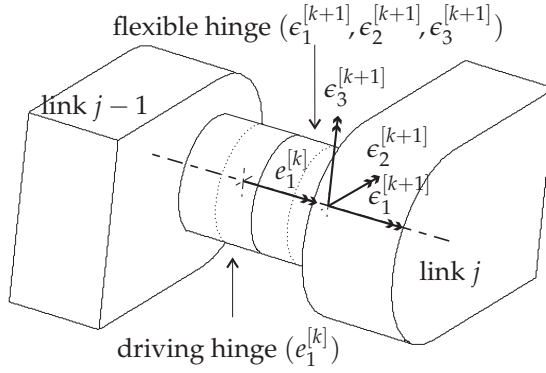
Kinematics joint assembly, in which  $k = 2j - 1$
